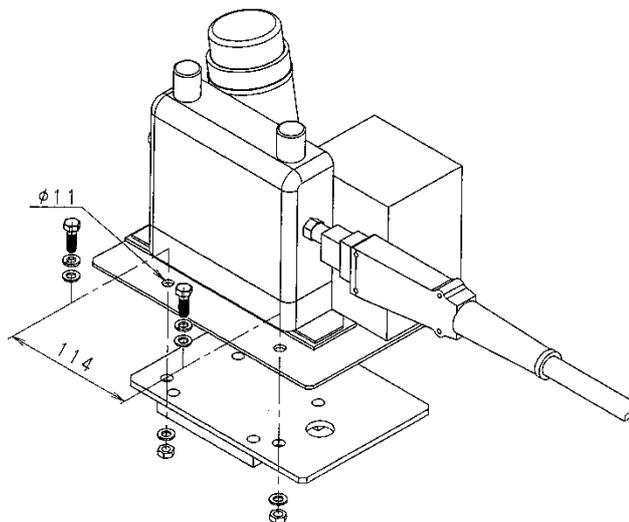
Mounting of wire feeding unit (Procedure 2)
